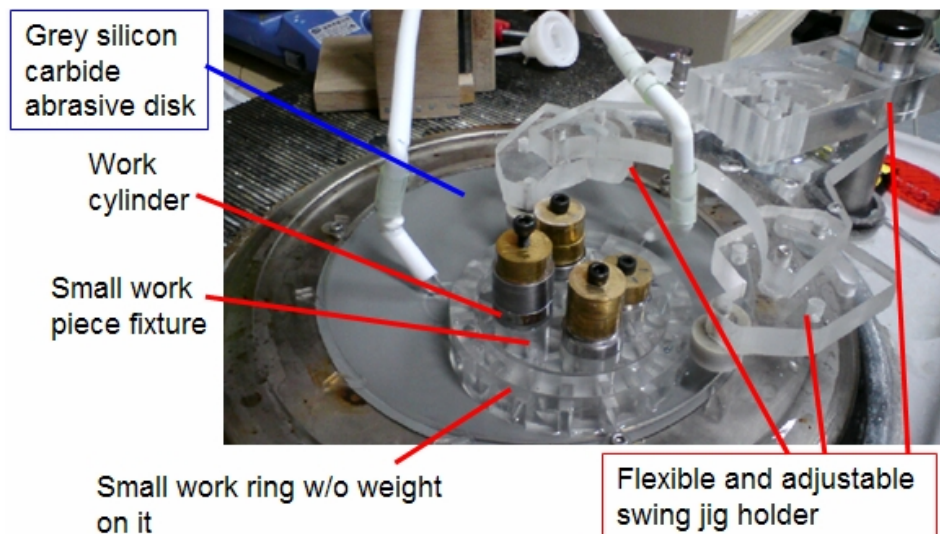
Flexible swing jig works with workpiece fixture of small size.
